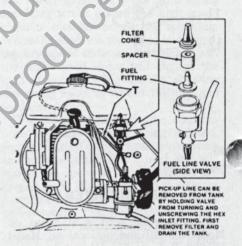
Drawing showing location of air pressure tube (T) to fuel tank. Fuel filter may be removed and cleaned.
